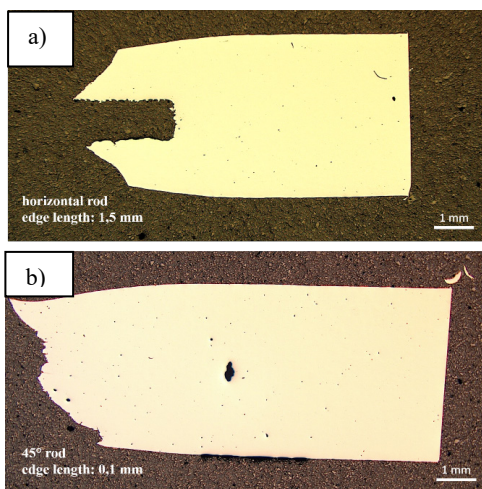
Prepared test specimens from the fracture point of the tensile specimens. a) defect with an edge length of 1.5 mm is elongated by the plastic deformation and lies within the fracture surface. b) fracture near a defect of 0.1 mm edge length.
